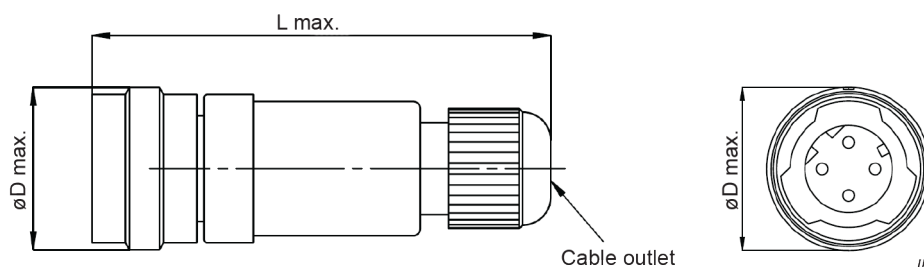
Style JF_M12_PPI – Rewireable connector, with female contacts, straight version, with inner push-pull and screw locking
